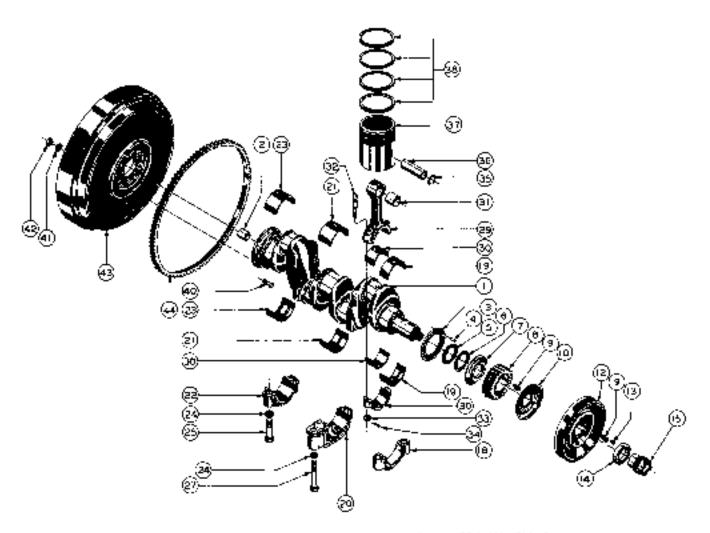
GRANKSHAFT, PLYWHEEL, CONN. RODS AND PISTONS
